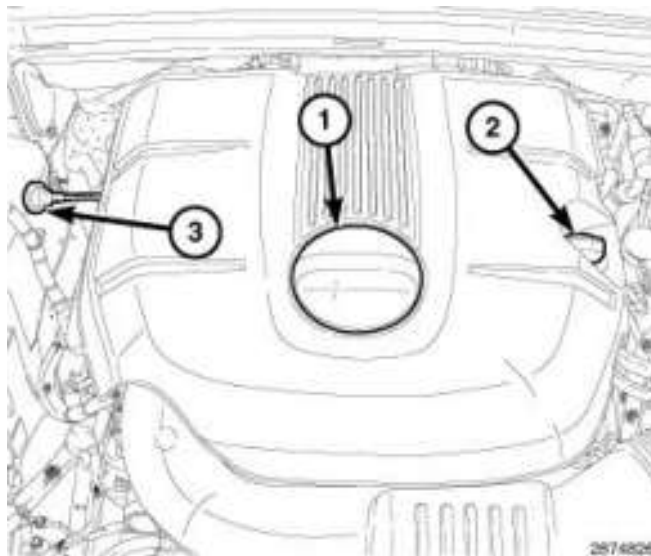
Oil Filter Access Cover, Oil Fill Cap & Oil Level Indicator
